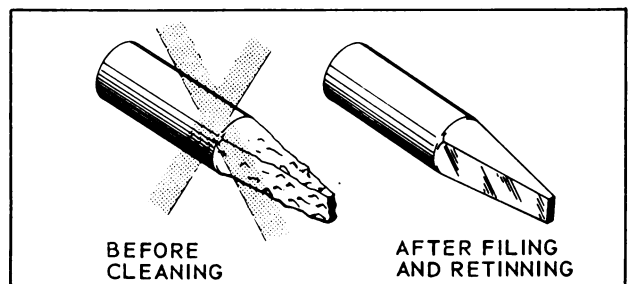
Soldering Iron Tip Before and After Cleaning
